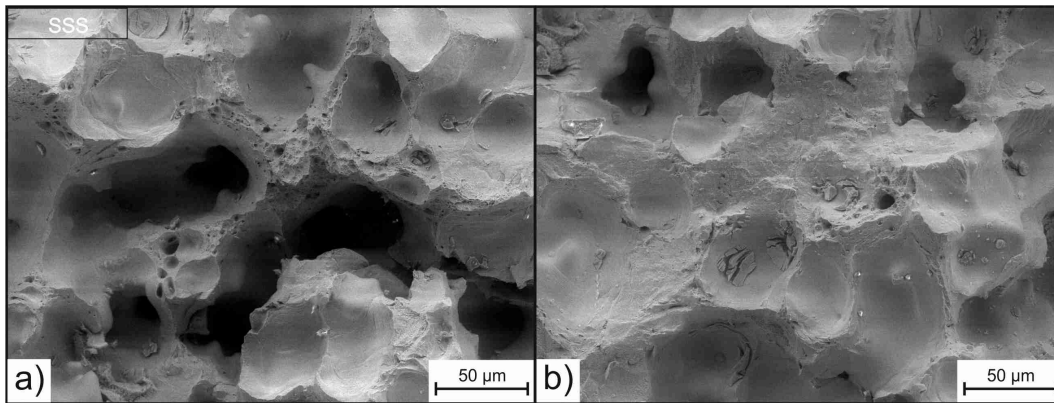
Overview of fracture surface, SSS specimen
